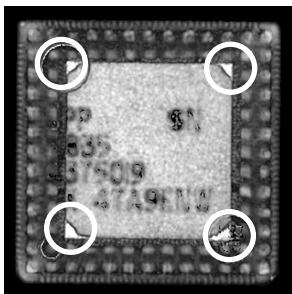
SAM image of the BGA soldered on PCB using a lead-free reflow profile. White circles: crack initiation
